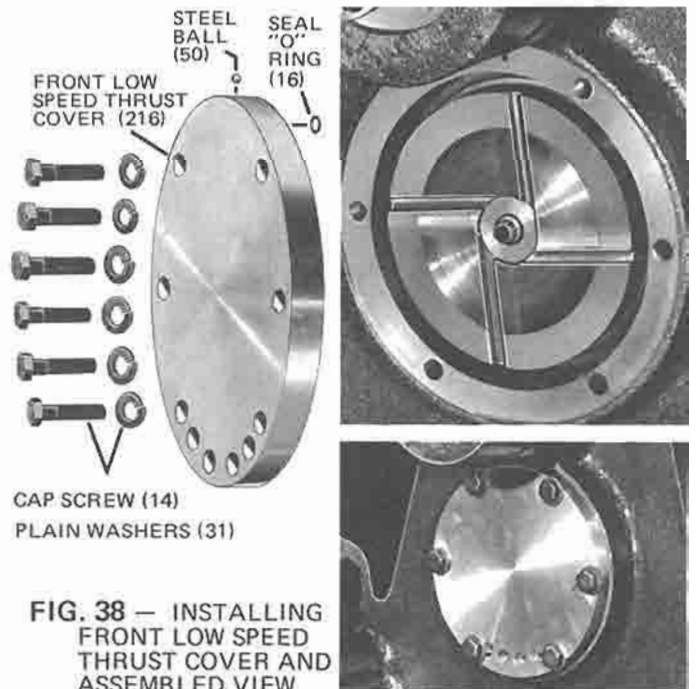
INSTALLING FRONT LOW SPEED THRUST COVER AND ASSEMBLED VIEW
